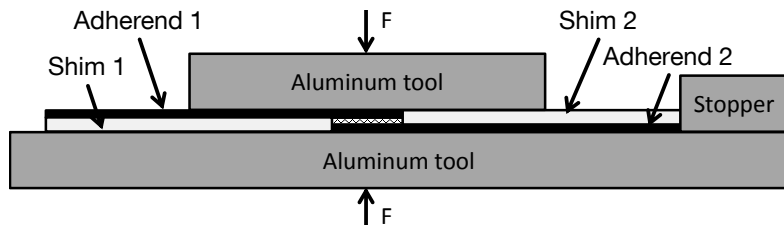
Sketch of the custom made fixture for curing the SLJ specimen with a constant bondline thickness.
